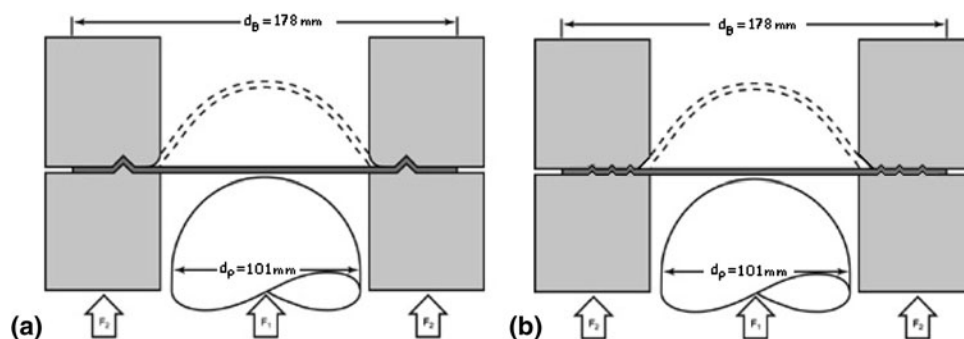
Schematics showing LDH punch and dies. The standard clamping dies with one large lockbead, which are typically used for ductile materials like mild steel, are shown in (a). The redesigned clamping dies for testing AZ31B sheet, with three small lockbeads using a 1.5 mm radius for each bead, are shown in (b). The original LDH tooling was obtained from Interlaken Corporation
